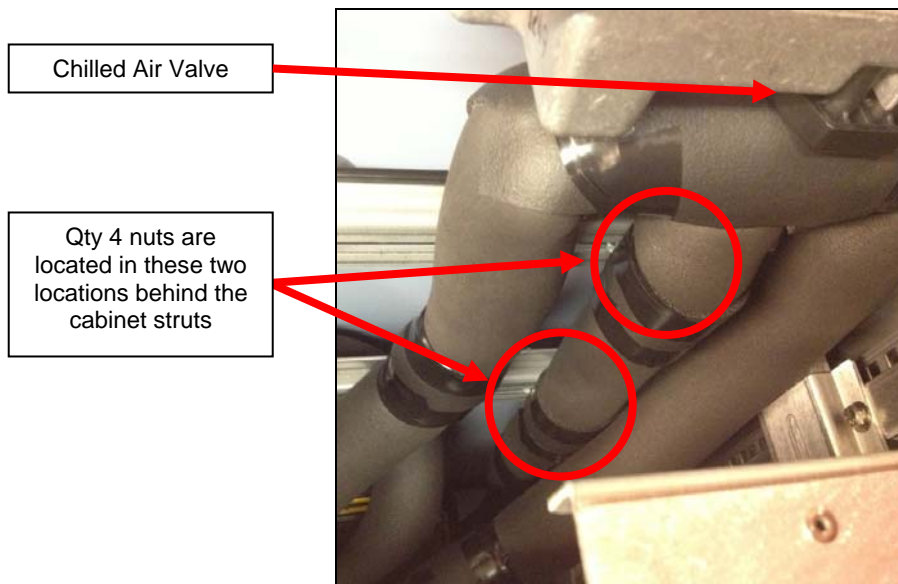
Location of 4 Nuts for Each of the GC and PE Valves
